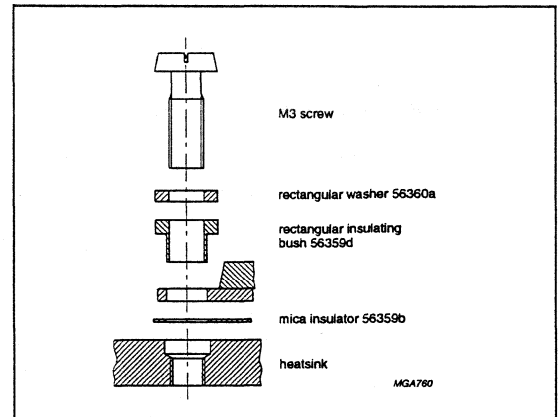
Insulated screw mounting with rectangular washer into tapped heatsink.
